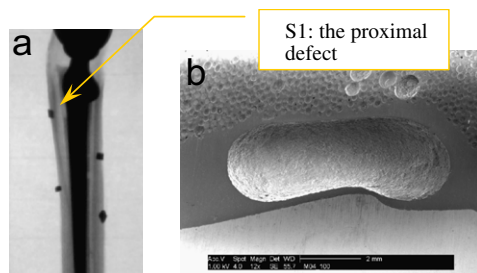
(a) Specimen, S1, with a proximal defect. (b) Defect section view.
